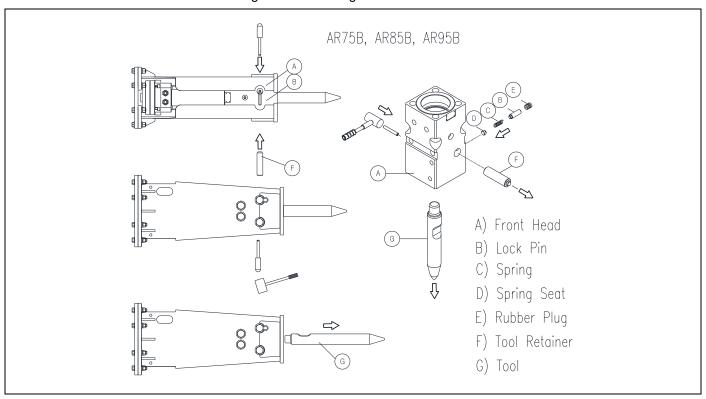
Removing the Tool – AR75B, AR85B, AR95B
